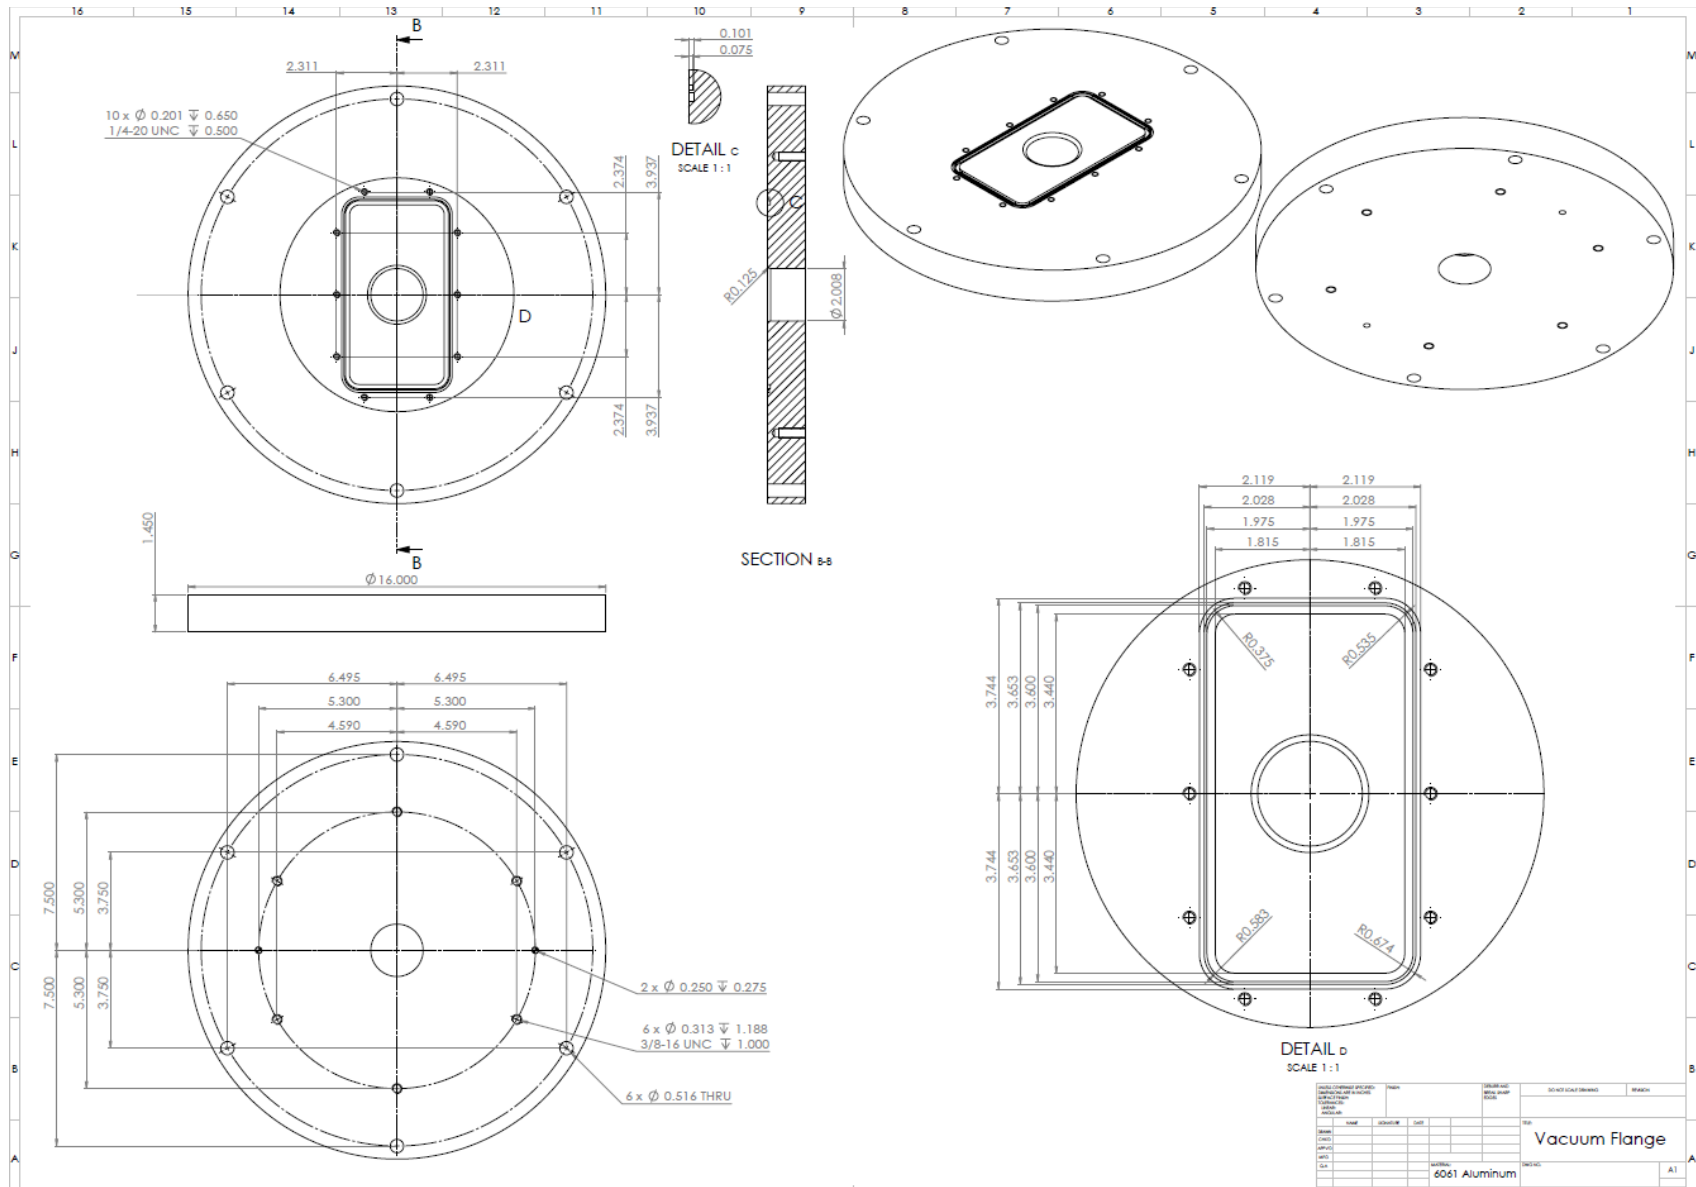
Vacuum flange of the MILO assembly that mates to the MELBA test chamber.
